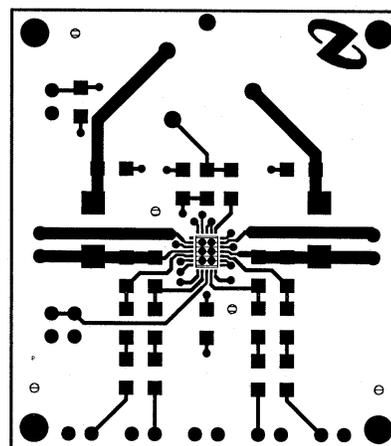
Recommended LQ PC Board Layout: Component-Side Layout
